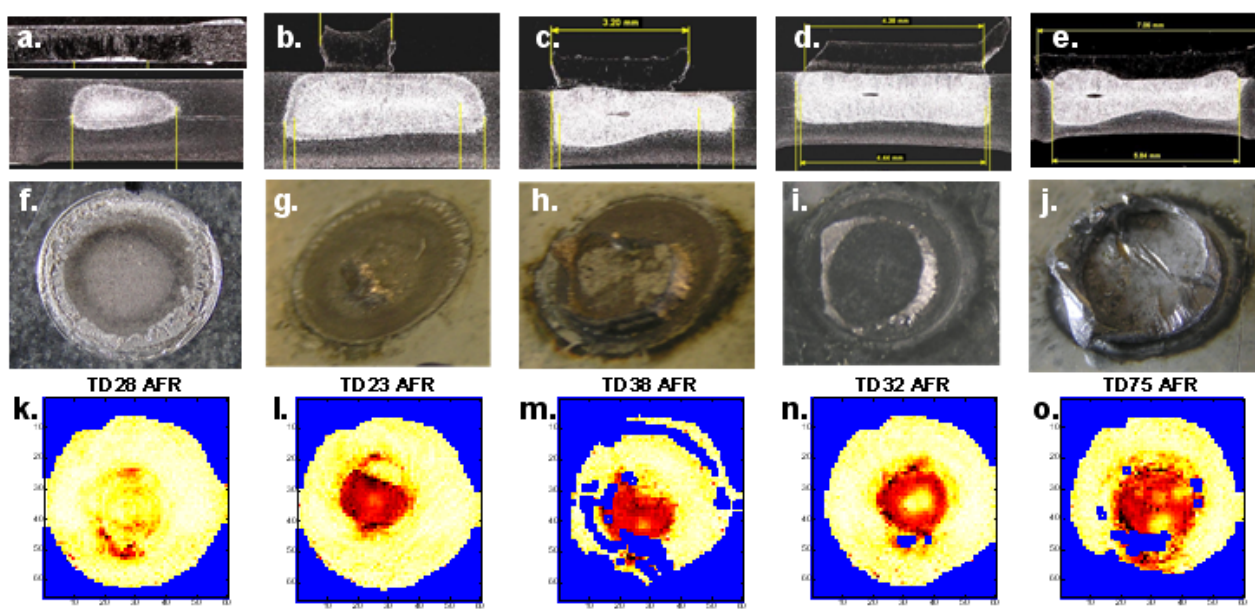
Metallographic cross-sections, pictures of weld buttons and ultrasonic AFR images for five welds in the thick-thick stackup with targeted qualities: stick, small, undersized, minimum acceptable, and large.
